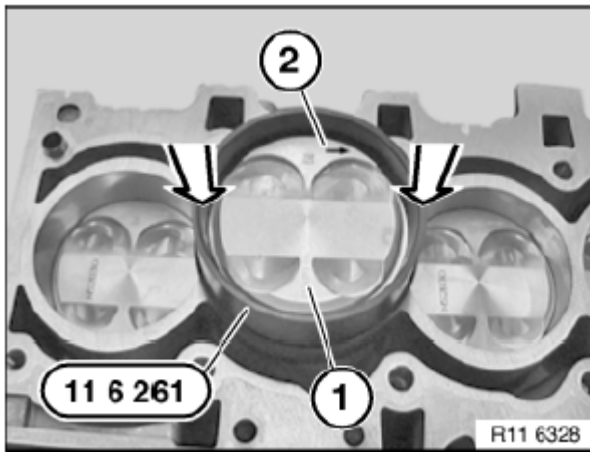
Identifying Special Tools (11 6 261) And Piston
